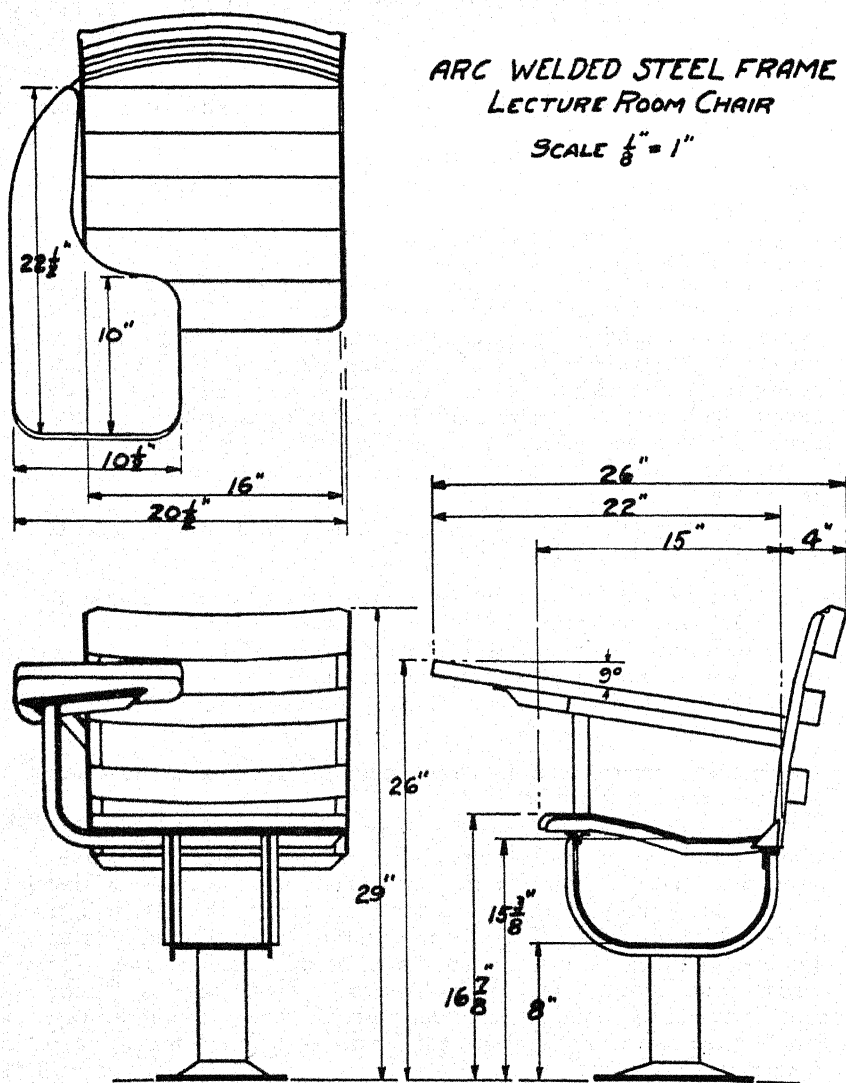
Arc welded steel frame lecture room chair. (See photo of chair in Fig. 7).
